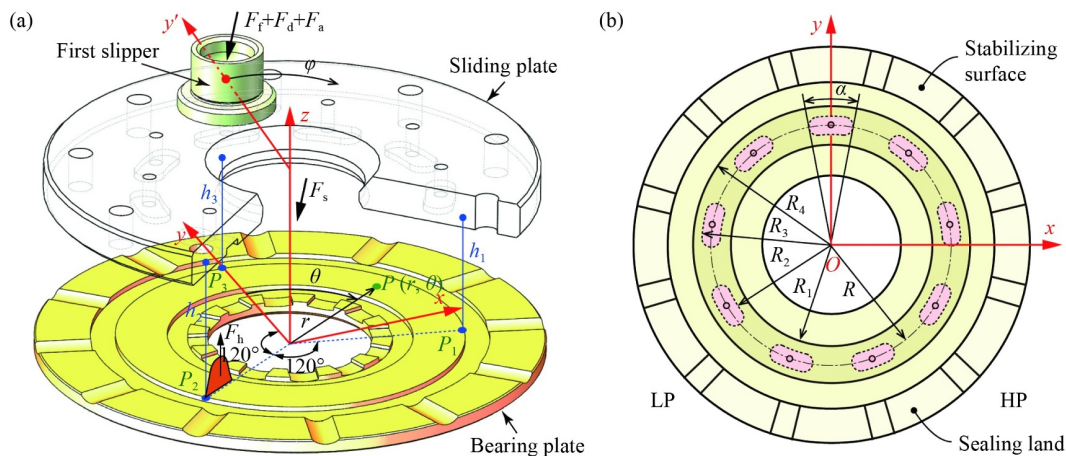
(a) Lubricating interface between sliding and bearing plates; (b) tribological surface of the bearing plate.
